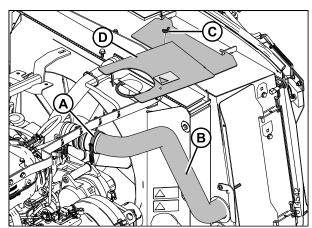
Charge Air Cooler Tube and Exhaust Shroud (Exhaust Stack Removed for Clarity)
